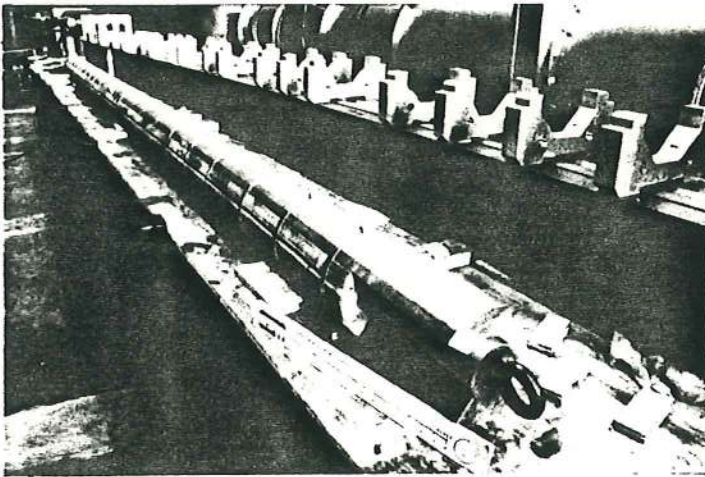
Rail/sidewall insulator package assembly fixture with full-scale rail/sidewall package test assembly
